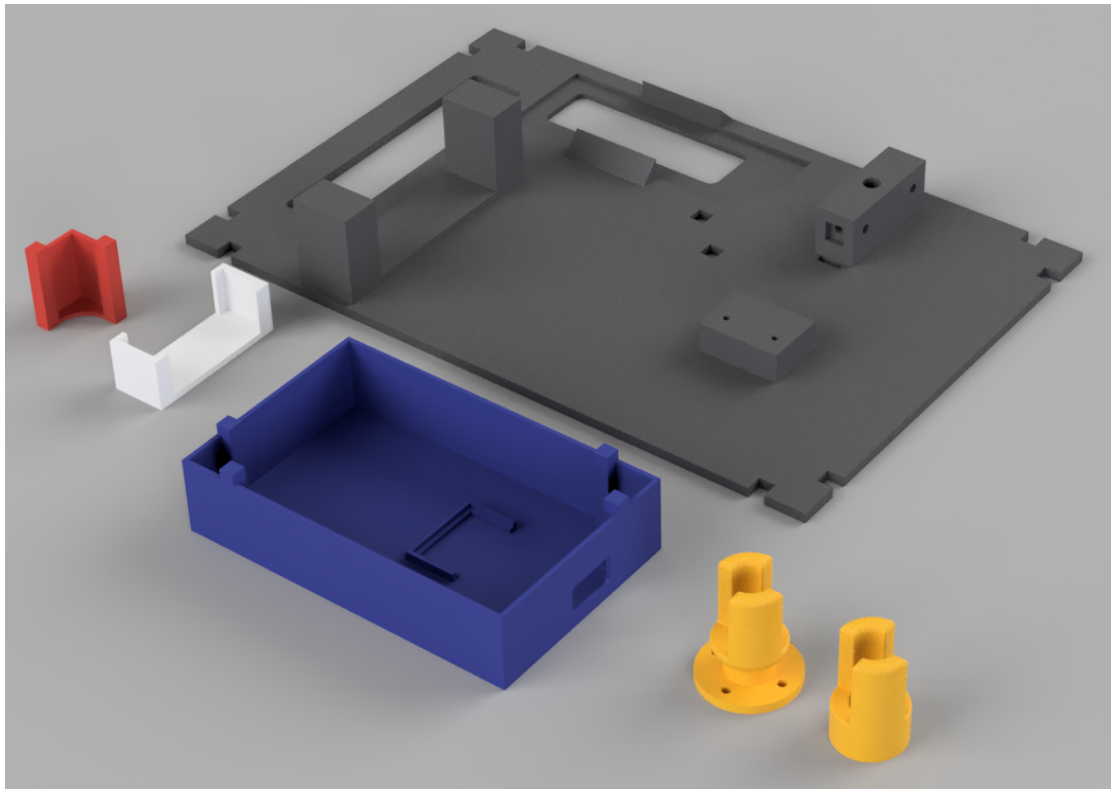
Rendered image of plastic parts used to assemble the separator. The separator parts are mounted on a common base-plate (grey). The separation block, motor and valve are mounted in fixtures on the top side of the base-plate. The electronic components, the microcontroller and (optional) battery, are housed in a box (blue) on the underside of the base-plate. A rectangular slot in the side of the box provides external access to the USB port of the microcontroller. The LED and the two light-to-frequency converters protrude into the sensor block via through-holes in the base plate. The LTF-converters are held in place by a tight-fitting “cap” (white) that fits around the sensor block, and the LED is held in place with a small dab of glue. A two-part spline coupling (yellow) is used to connect the positional servo motor and the needle valve. Three legs (red) slot into grooves in the corners of the base plate. One corner of the component box (blue) serves as the fourth “leg”.
